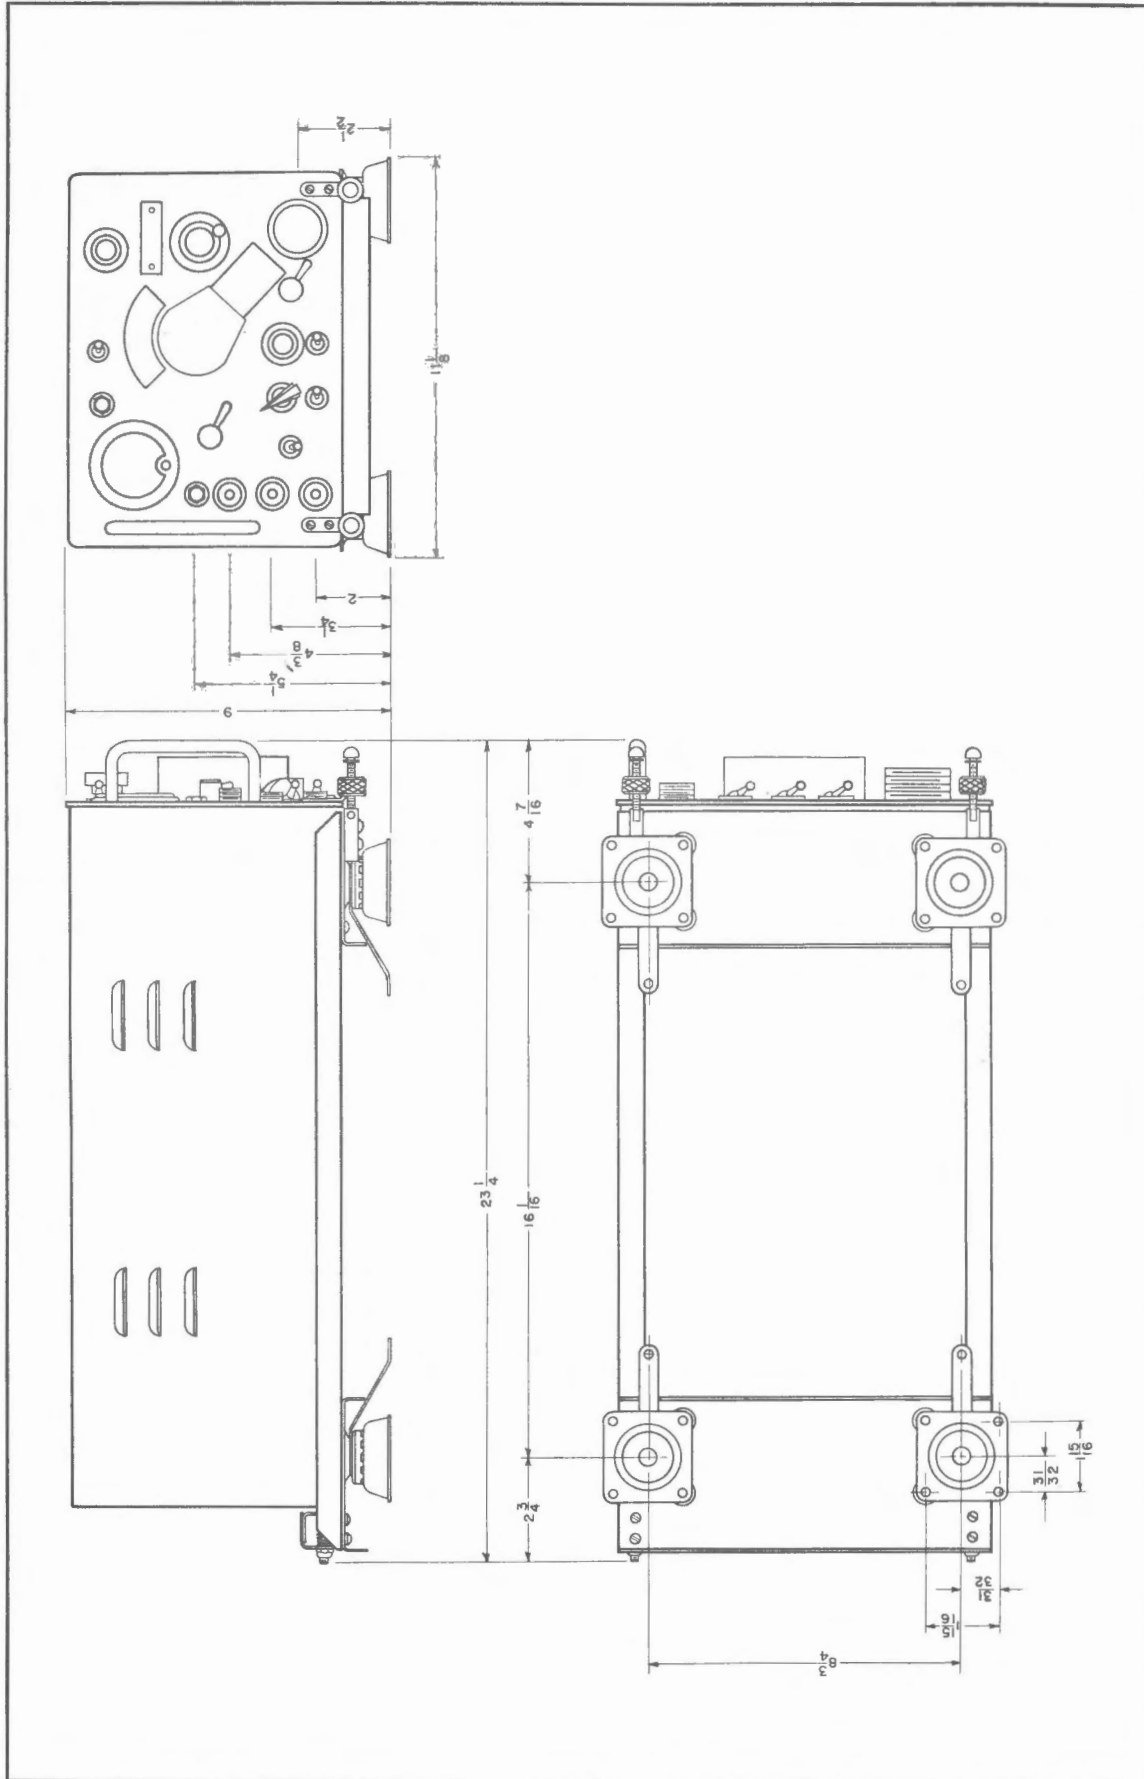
Radio Receiver R-44/ARR-5—Outline Dimensions
